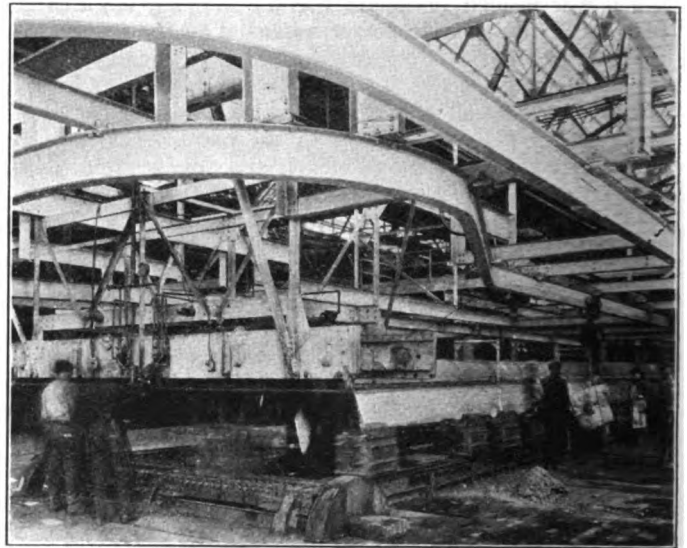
AFTER THE MOLDS HAVE BEEN POURED THEY TRAVEL TO THE END OF THE OUTSIDE CONVEYOR WHERE THEY ARE SHIFTED MECHANICALLY TO THE CENTER CONVEYOR THAT CARRIES THEM TO THE SHAKE-OUT ROOM
